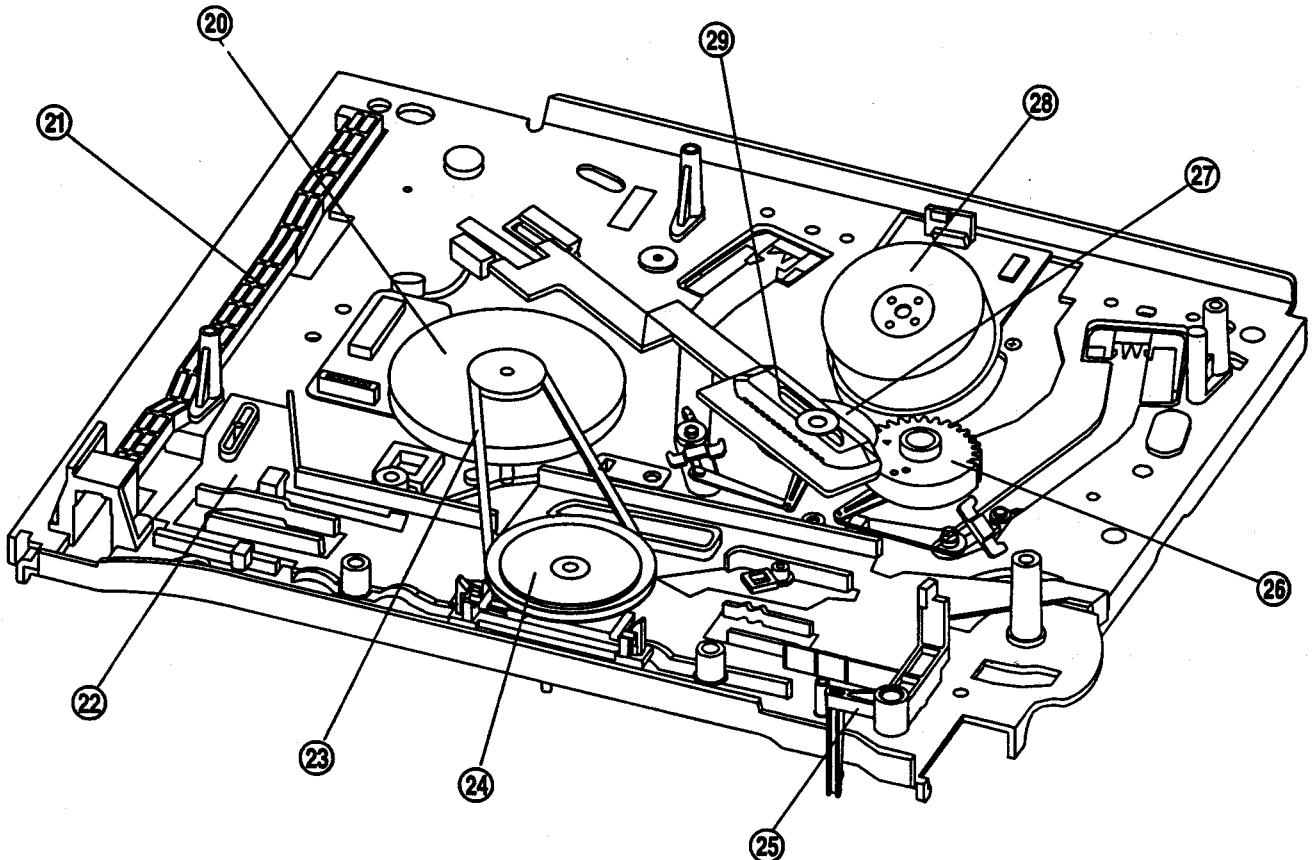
Tape Transport Mechanism Identification (Bottom View)
